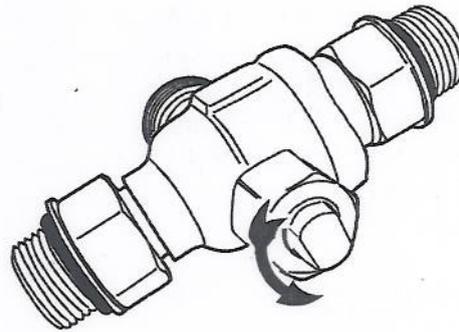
DUAL OIL FILTER ISOLATION VALVE
